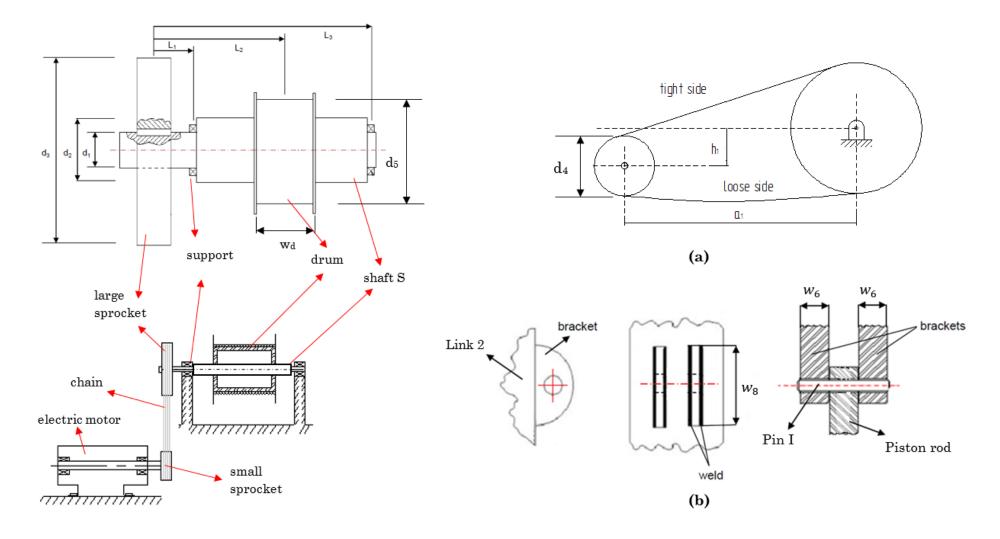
Detailed drawing of shaft S, chain drive system (a) and the weld region (b)
